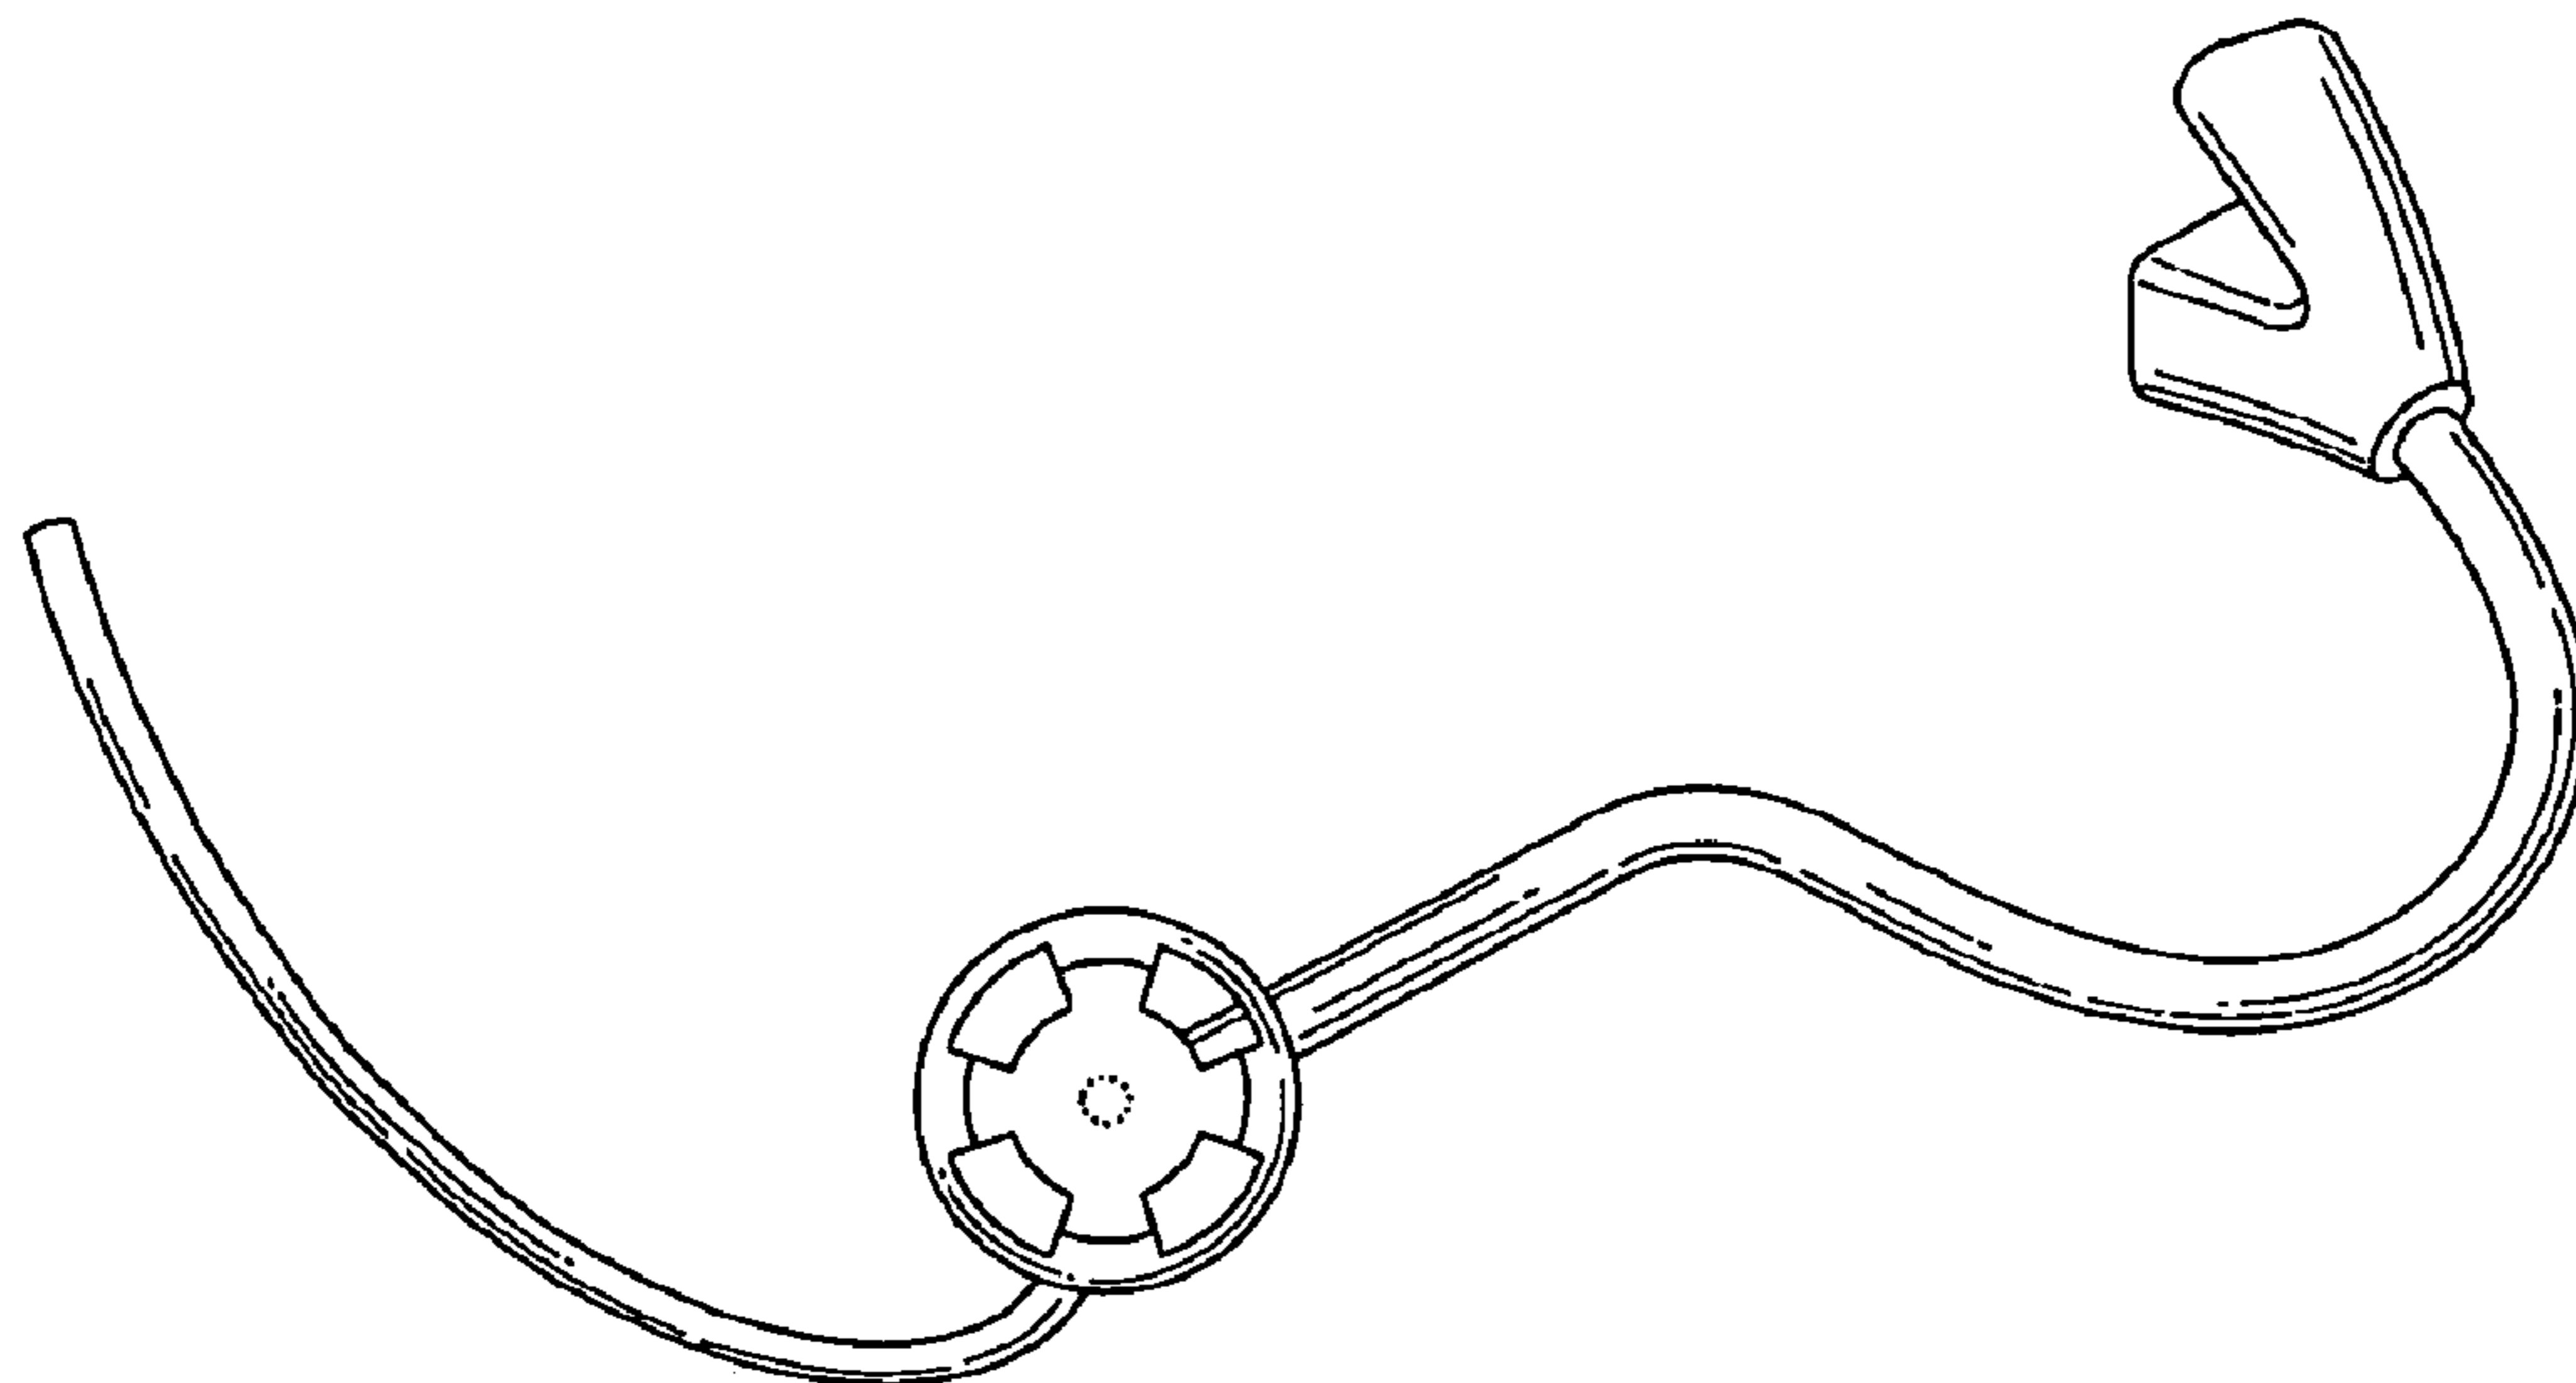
is a perspective view of another embodiment of the hearing aid earpiece of the present design;
